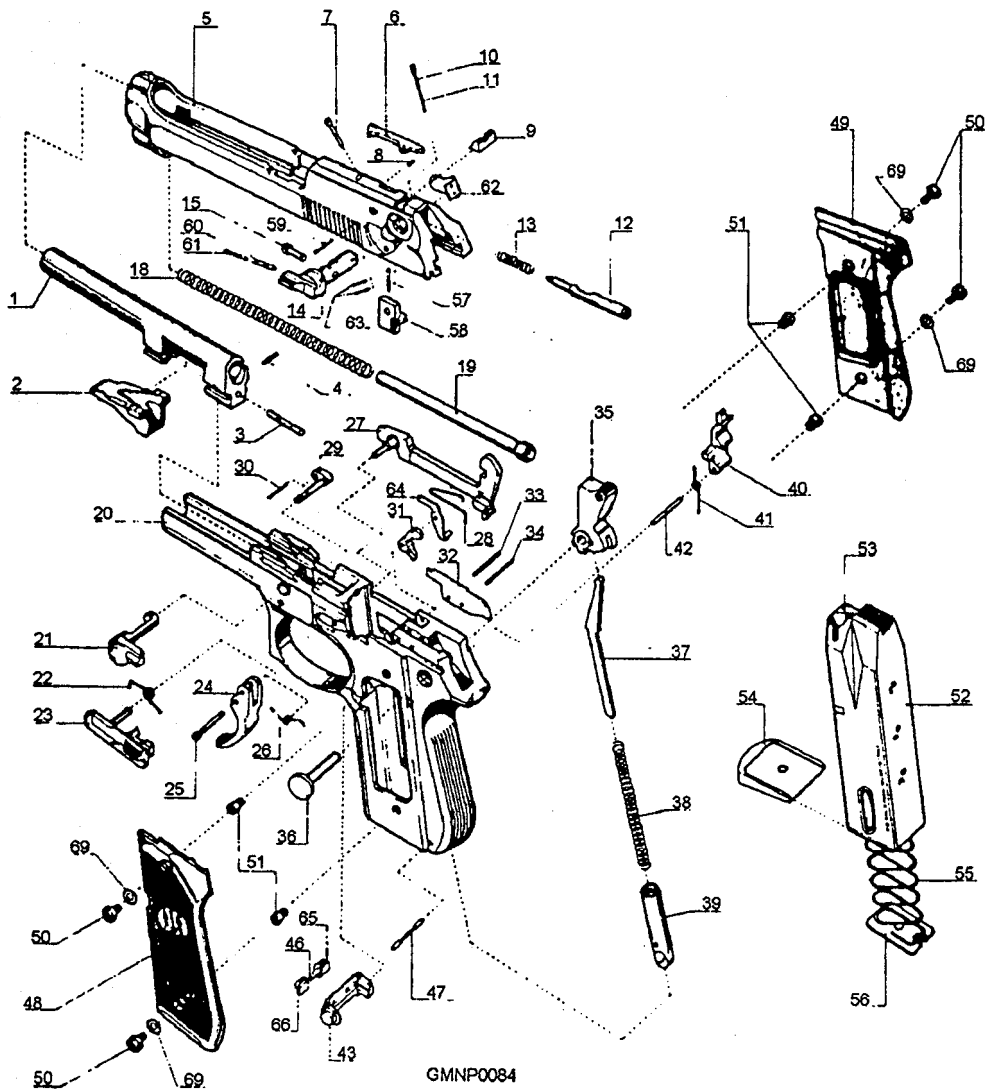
Detailed disassembly of the 9-mm M9 pistol.
